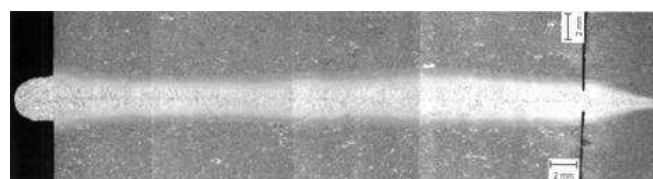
Electron Beam weld on 40 mm thickness Eurofer sample
